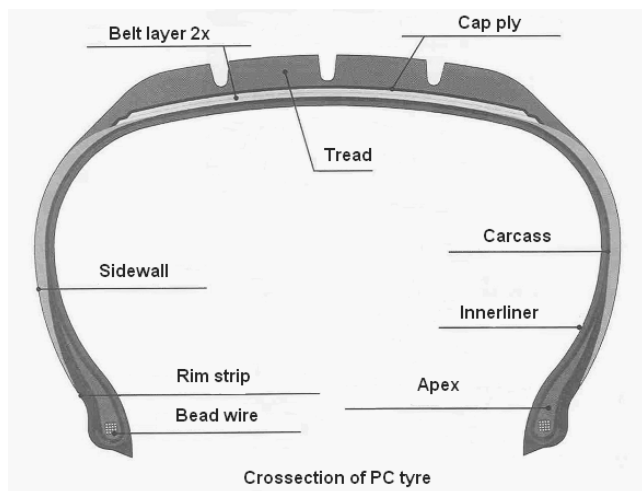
Cross section of radial tread in a passenger tyre: 1 - inner-liner, 2 - carcass material, 3 - bead wire (core), 4 - apex, 5 - tyre strip, 6 - rim (bead) strip, 7 - sidewall, 8 - breaker strip, 9 - PA breaker strip, 10 – tread
